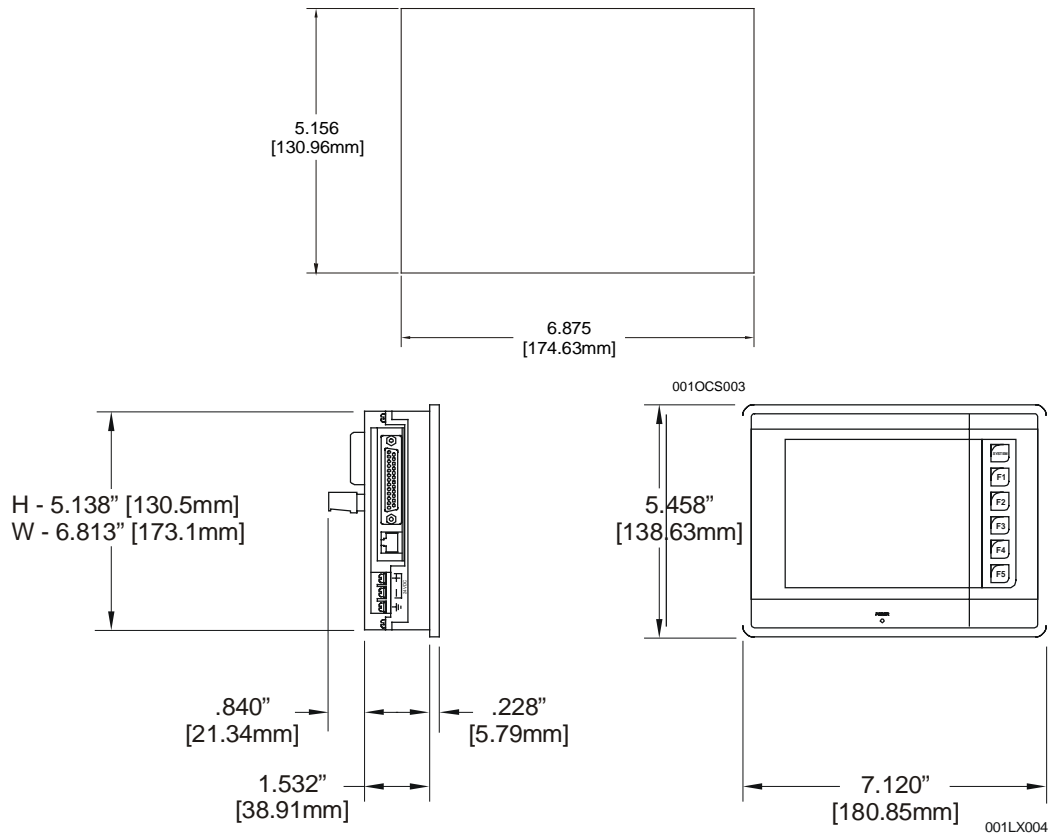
Side View of LX with Mounting Clip (Shown as an Example)
